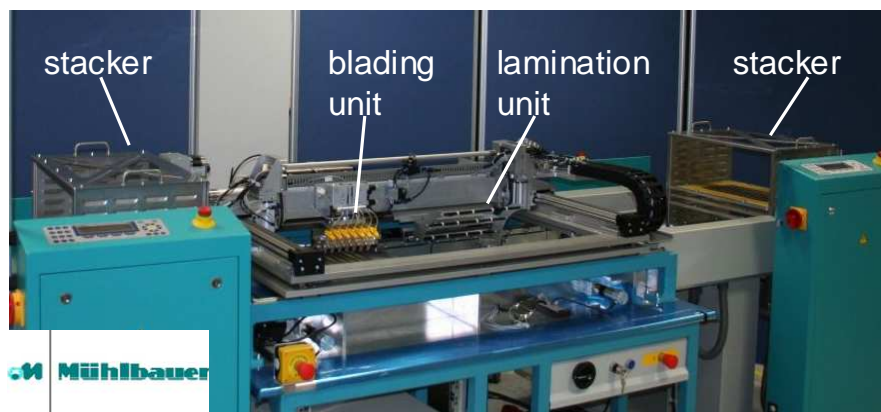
Preliminary set-up of EOCB production machine
